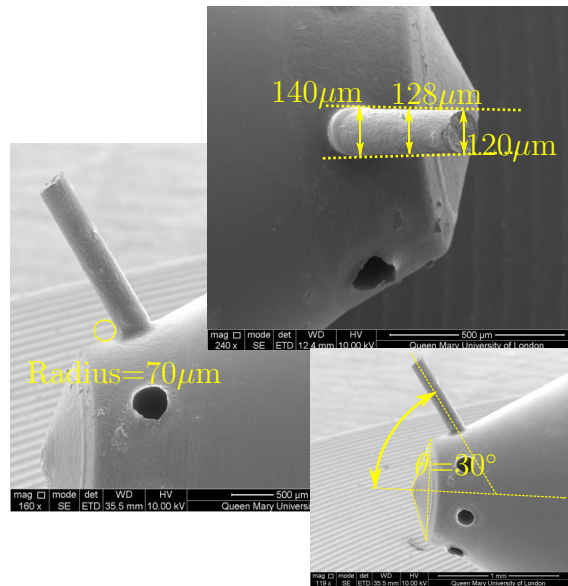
SEM images of the silicone mold of the injector nozzle after all but one hole had been welded. The welded holes are visible as black circles. The yellow text shows the sizes and angles as determined using ImageJ.
